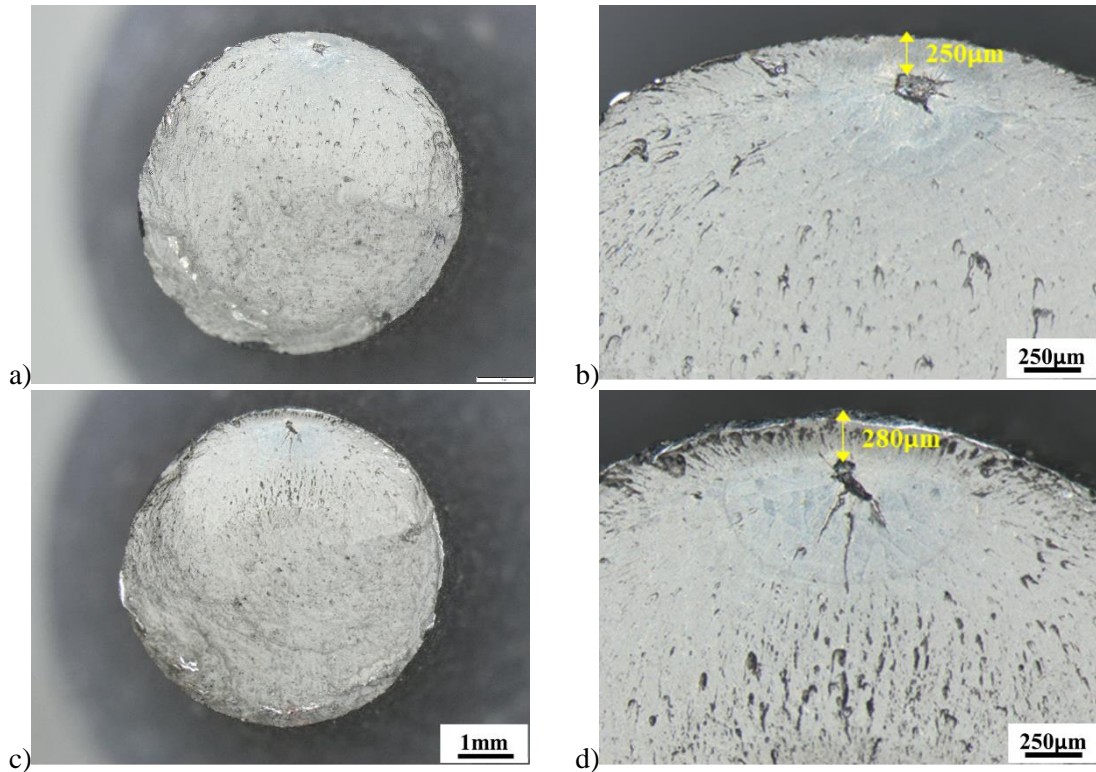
Fracture surfaces pictures of Hirtisation® specimens. a,c) 12,5x; b,d)40x
